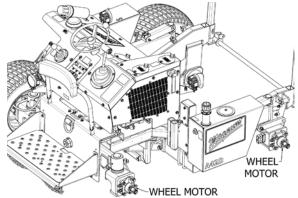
Wheel Motors (Wheels removed for clarity)
